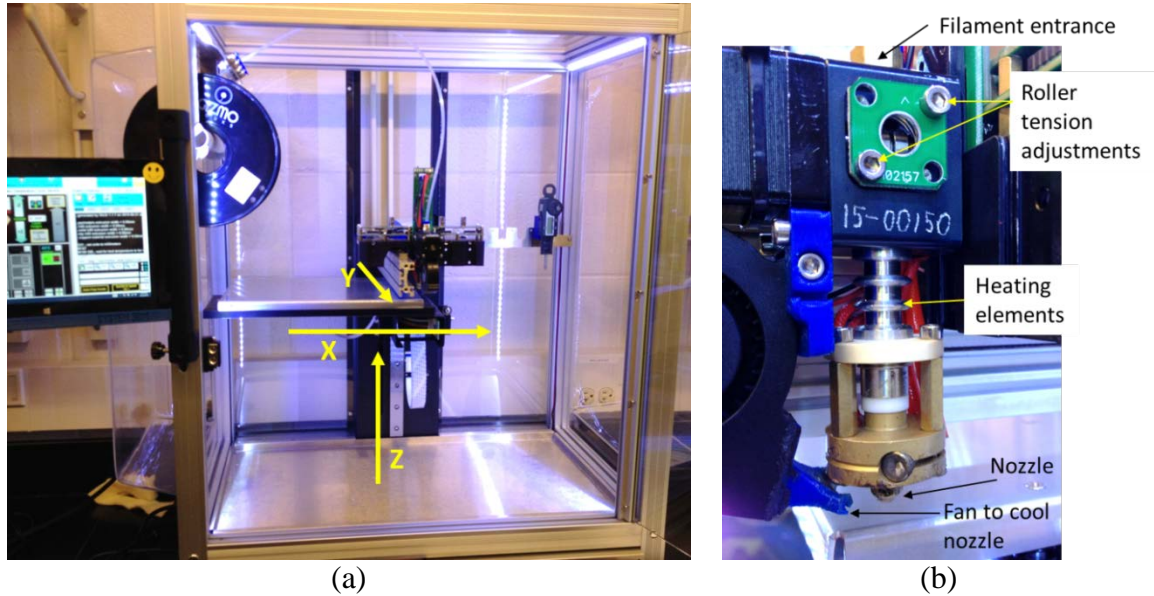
(a) HYREL System 30M machine with (b) close-up of extrusion head
